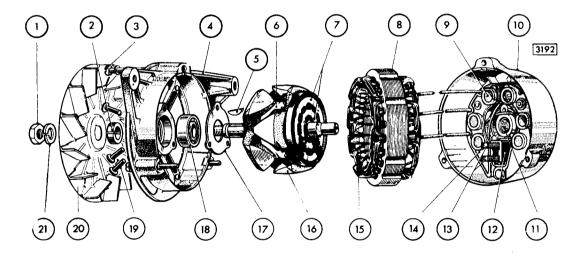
Exploded view of the Lucas 11 AC alternator.
